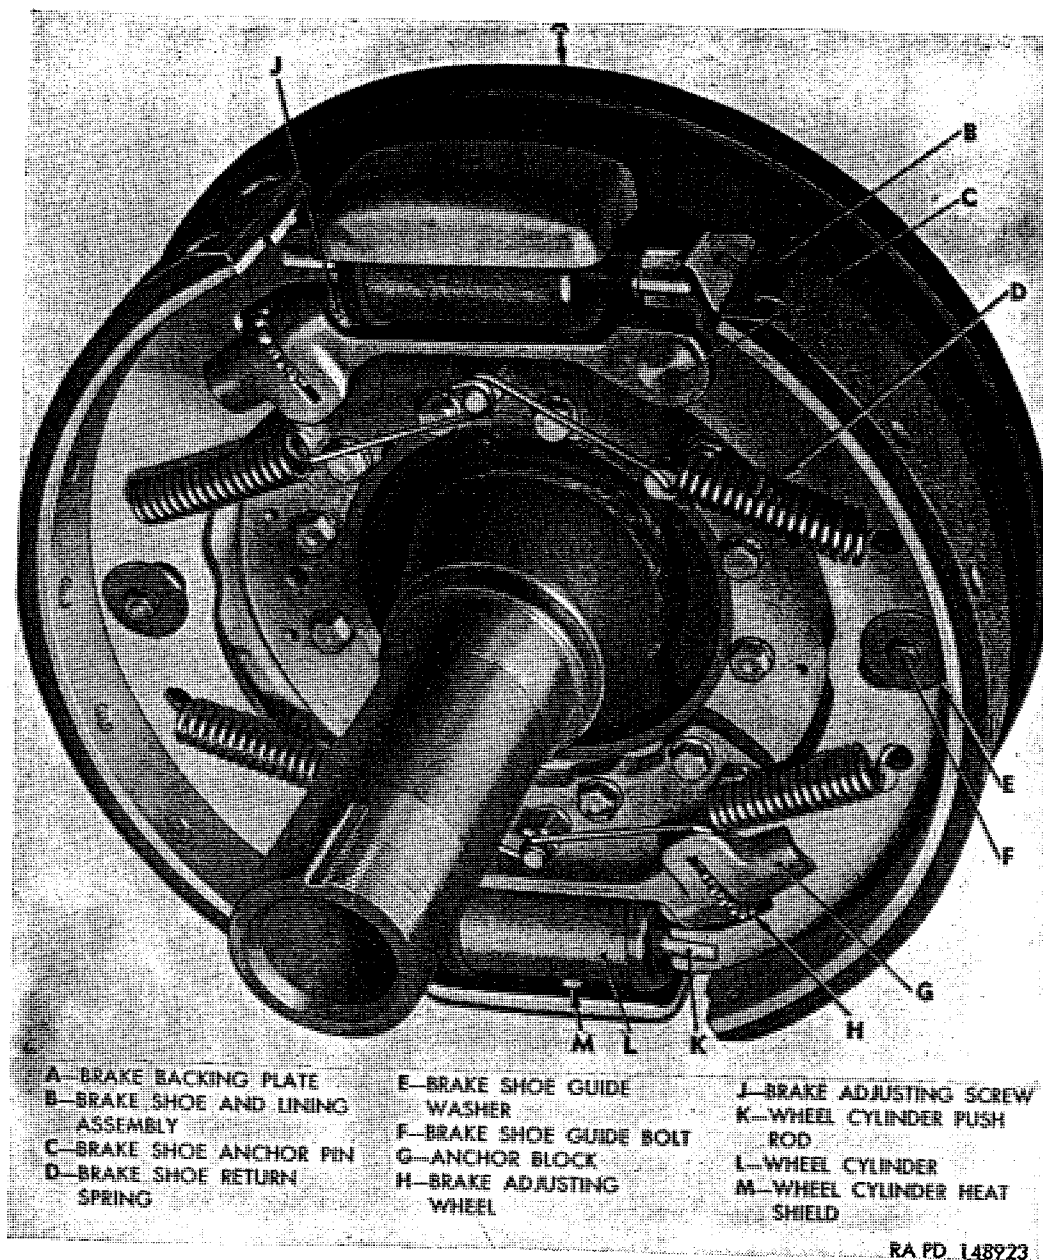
Brake shoes and wheel cylinders installed (rear shown).
